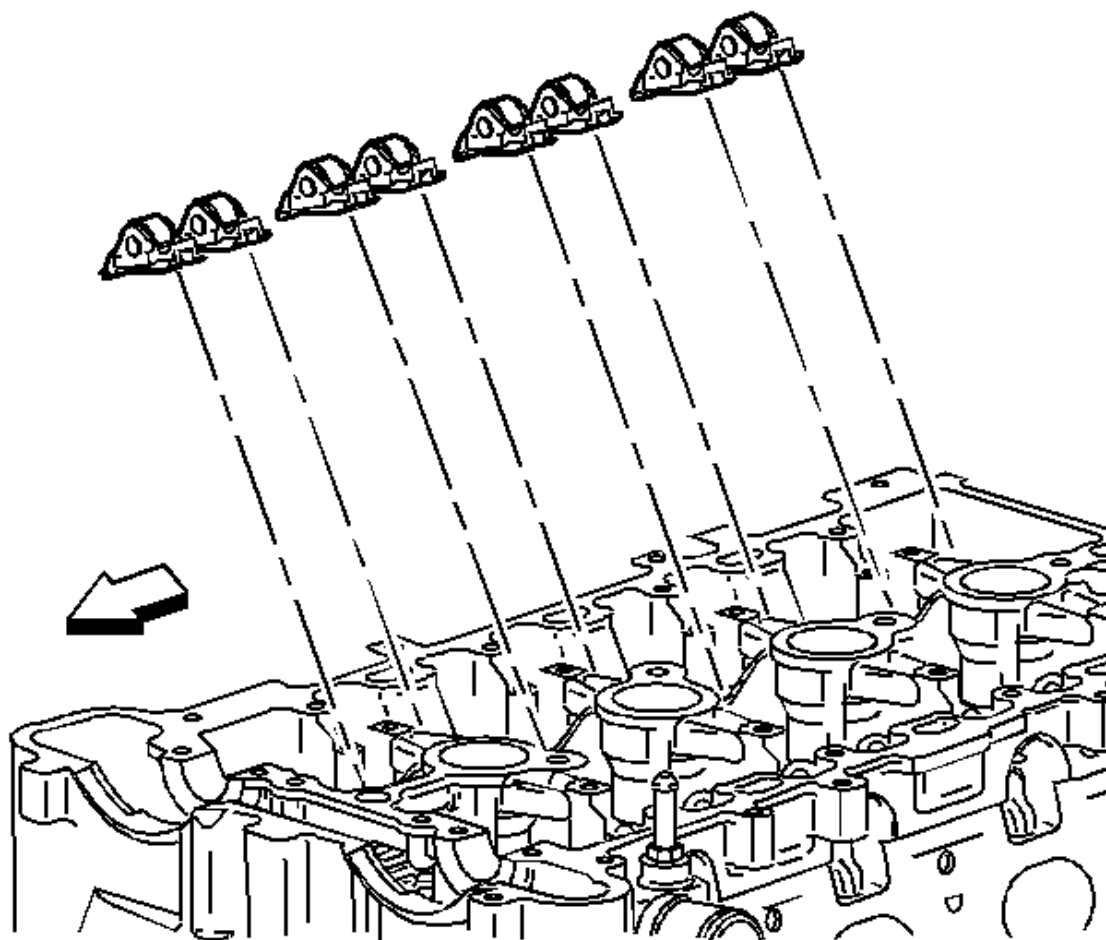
Identifying Exhaust Camshaft Roller Followers
